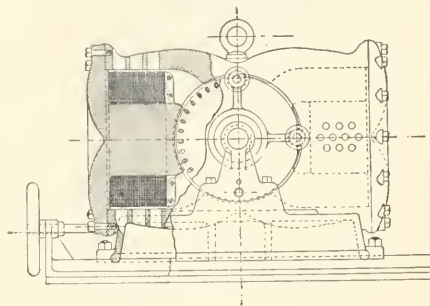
SECTIONAL END VIEW OF WENSTROM DYNAMO, SHOWING BEARINGS, COMMUTATOR, ETC.
